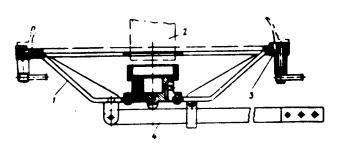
A Jack for Axial Shifting of the Compressor Rotor
